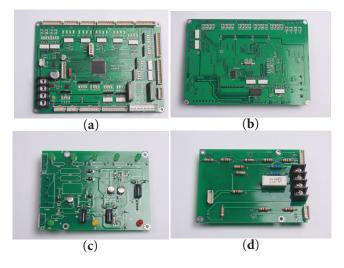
PCB board for PC in 3 point trolley. (a) Board front of 3 point trolley main control. (b) Board rear of 3 point trolley main control. (c) Board front of 3 point trolley for display. (d) Board rear of 3 point trolley for display
